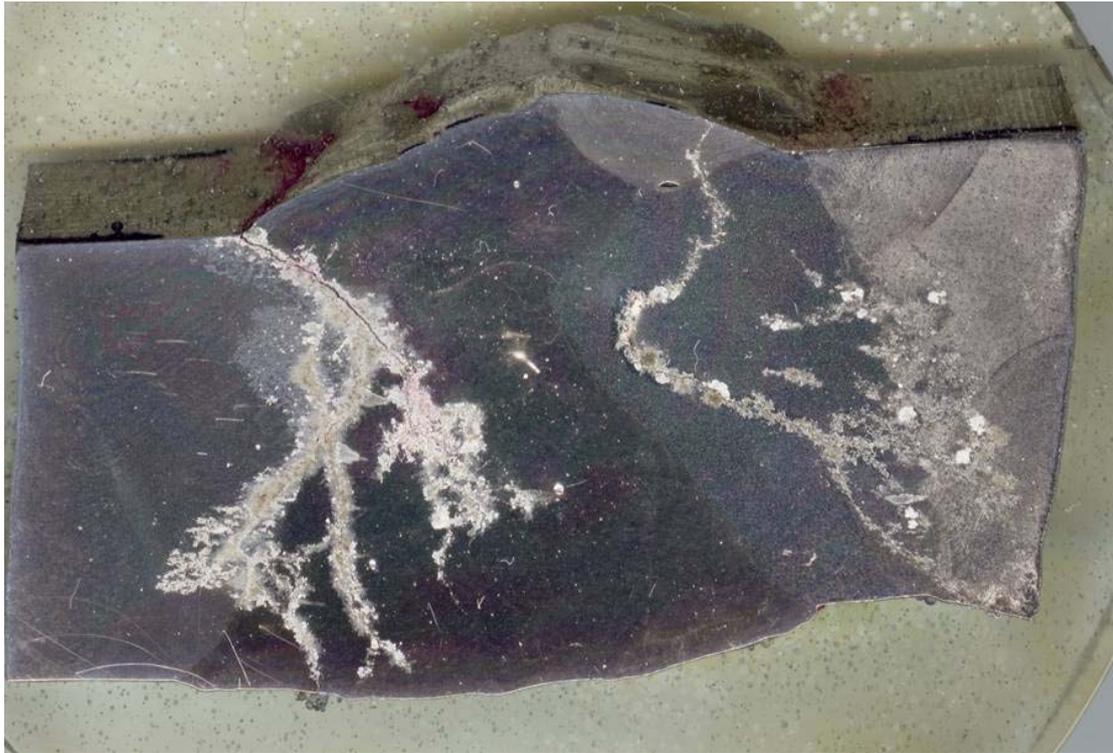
Liquid Metal Embrittlement Failure on Brazed Aluminium Heat Exchanger
